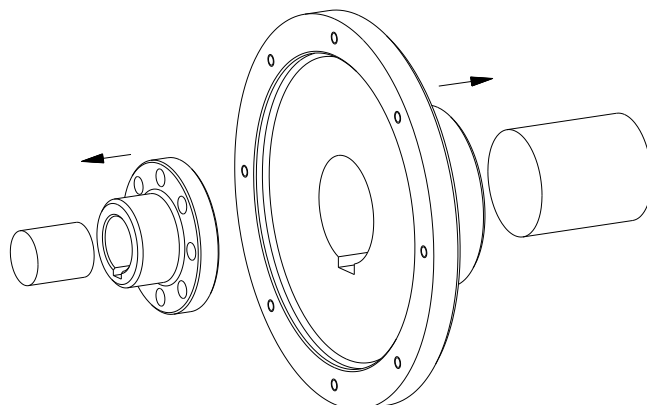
Assembly of the hub and flange hub resp. the coupling flange with additional flange (example: type HEW-ZS (size 48 to G 80))
